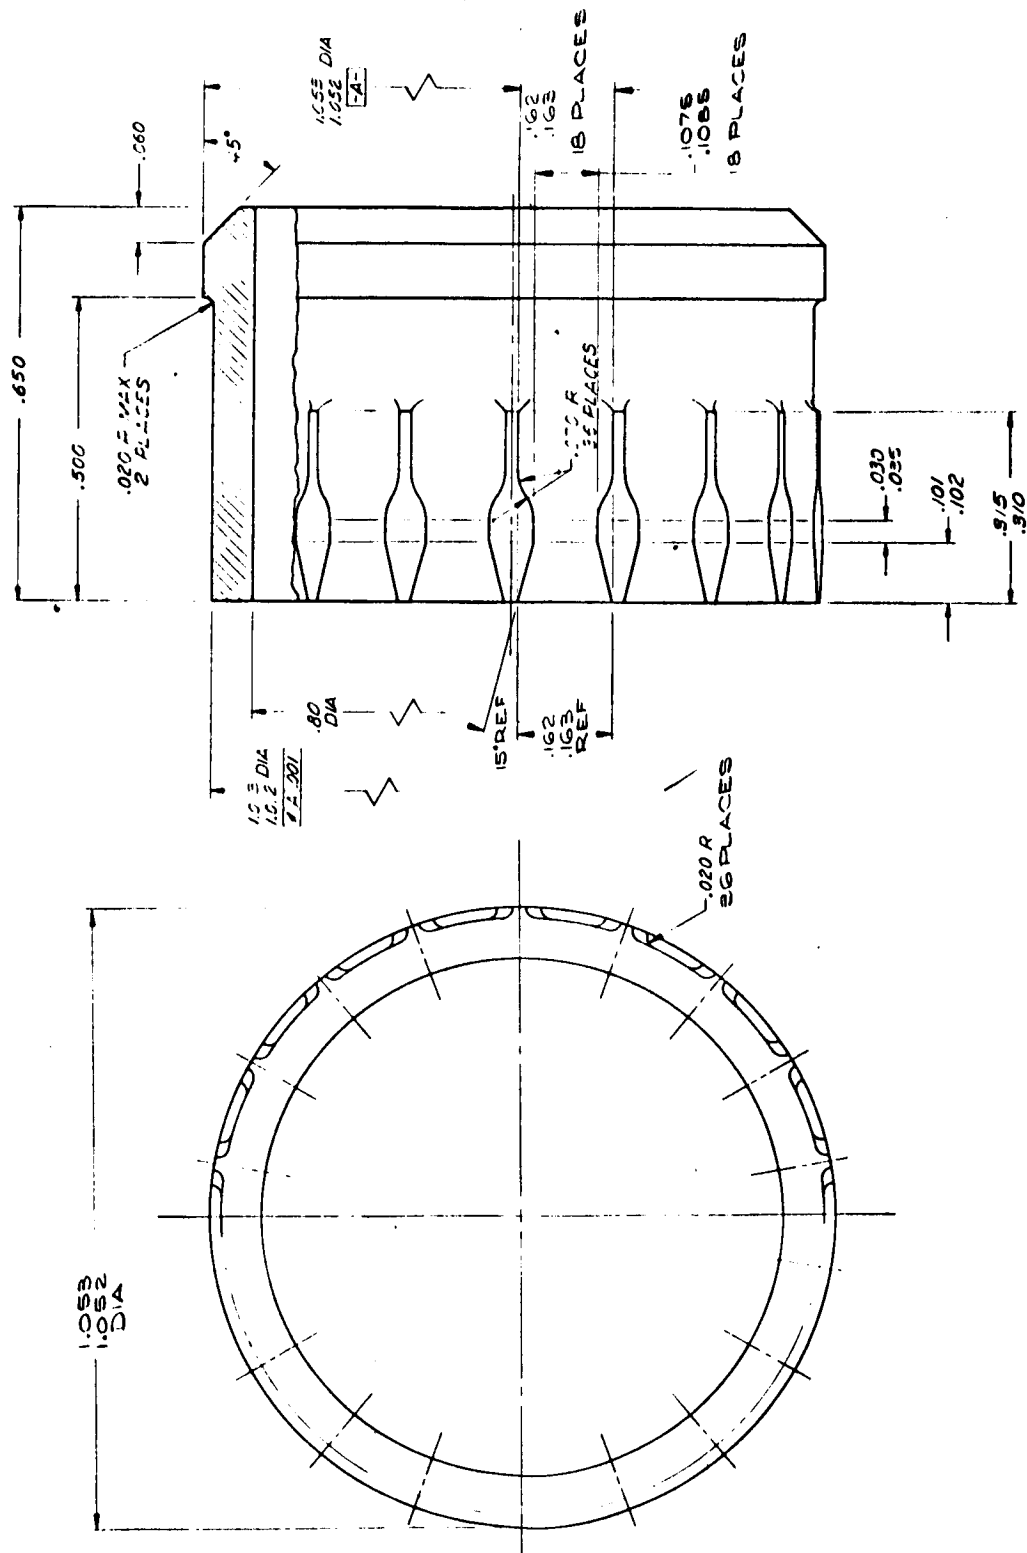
NOZZLE DESIGN FOR THE CYLINDRICAL SUPERSONIC FILM COOLANT INJECTOR, ALDC D/N 1162085
